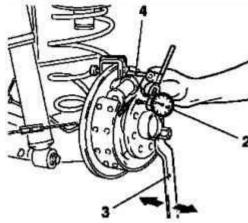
Measurement oblique gap block bearing: 1 - magnetic holder, 2 - a special tool, 3 - Bracket 4 - a special tool
